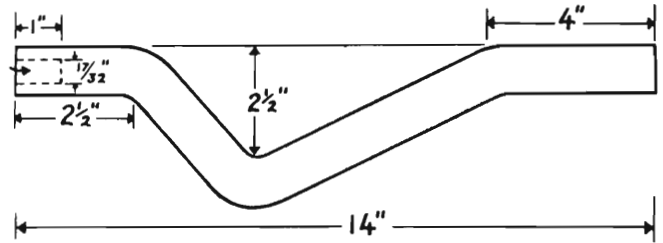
A – Hood hinge retaining “push-nut installer” (manufacturing sketch)
